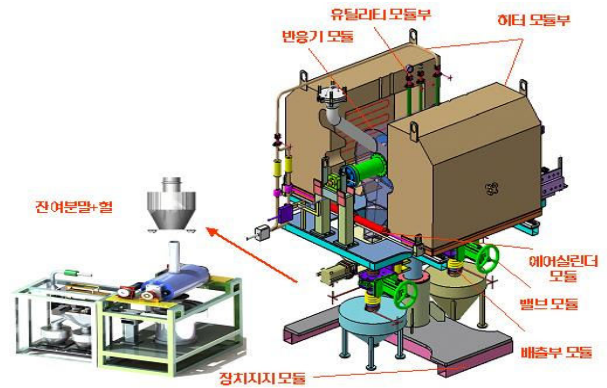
3D(dimensions) design of high-throughput vol-oxidizer
